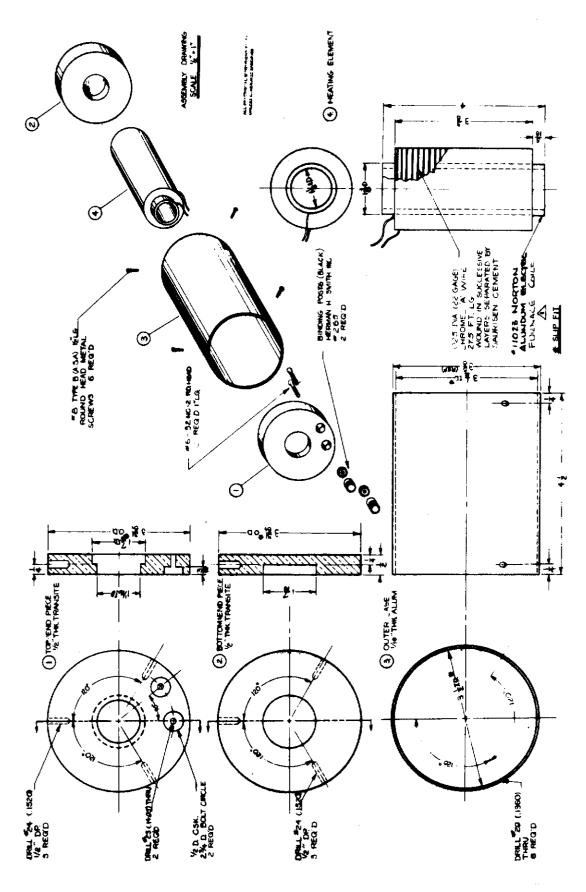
ASSEMBLY FOR 500 WATT 5-ML BOMB FURNACE
